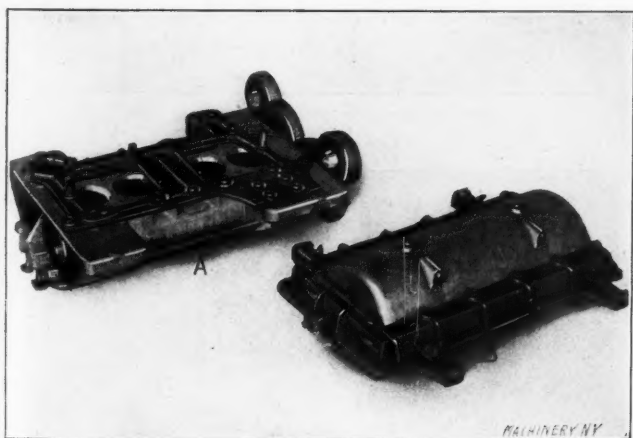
Drilling Jigs for Upper and Lower Crank Case
